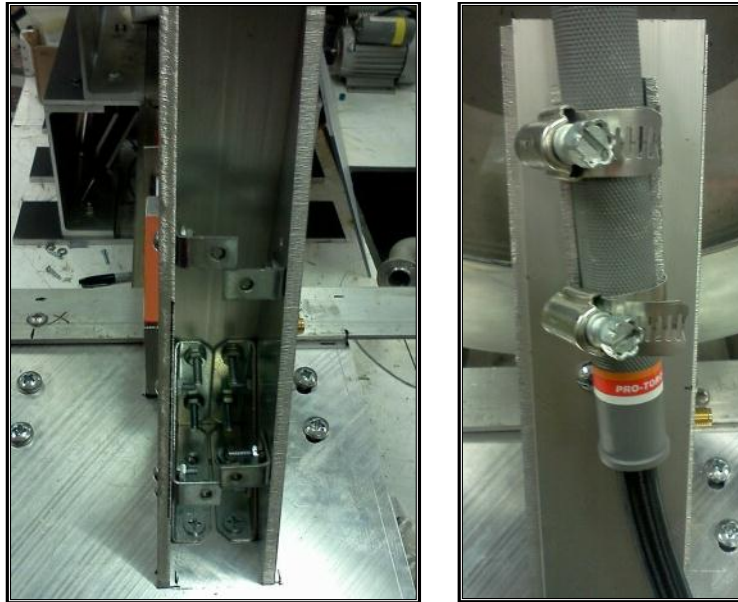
(left) The torch head holder without the top piece and (right) the complete torch head holder.
